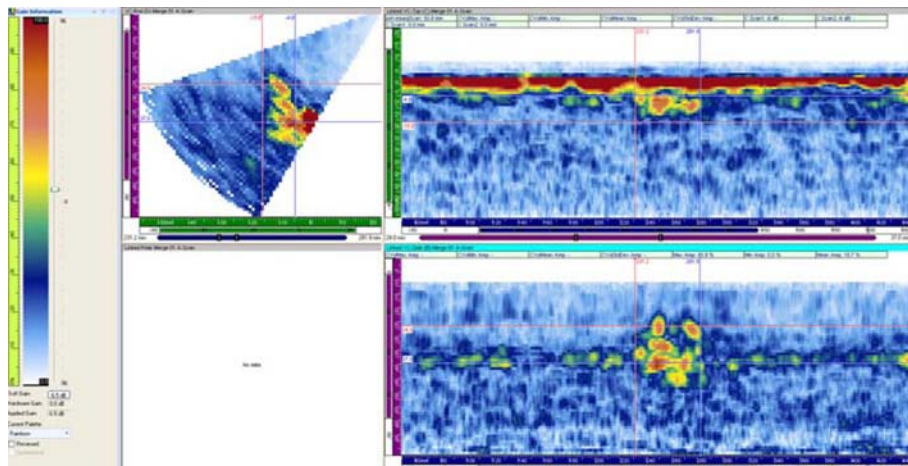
Specimen 9C-034 Flaw 3 After Weld Crown Removal at 2 MHz
